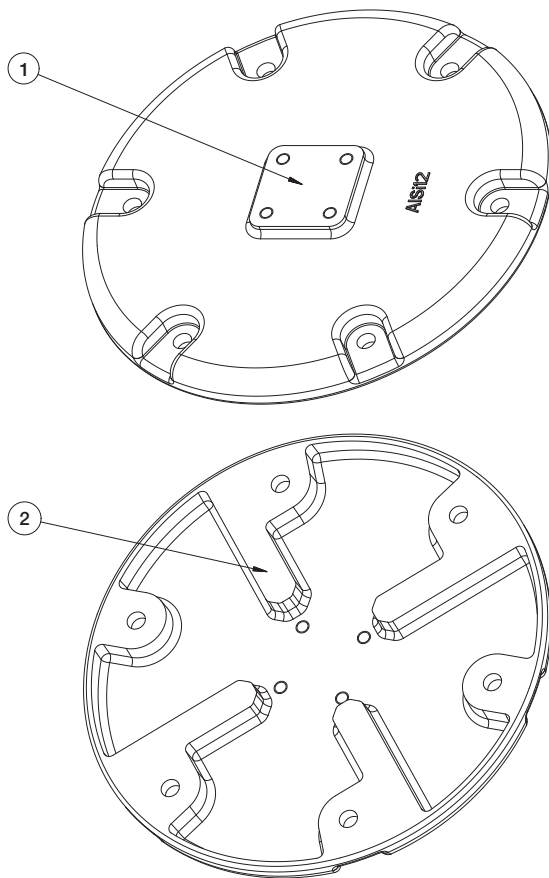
View of the undrilled top plate. Point one (1) is the mounting extrusion for the primary terminal and point two (2) is the gusset which can be drilled.
